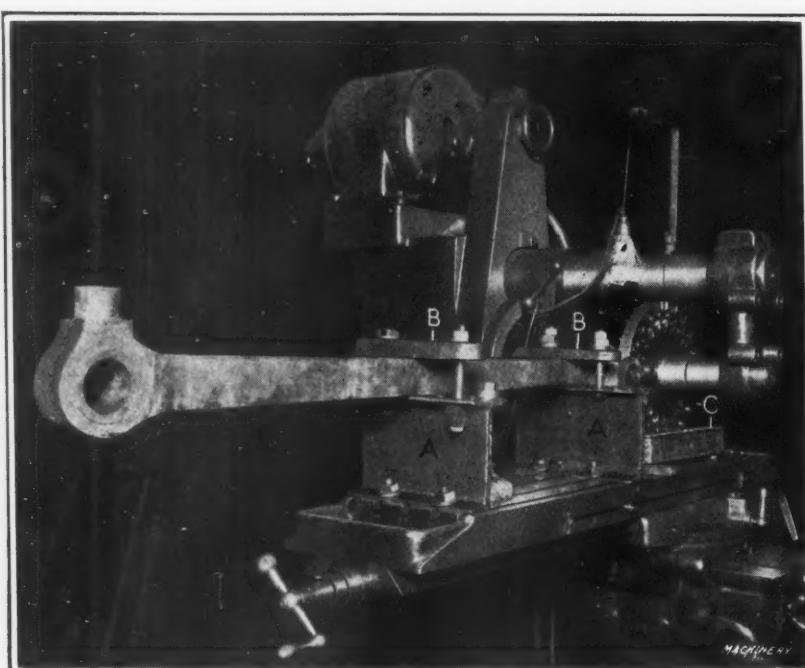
Milling Machine equipped for facing Boases on Eccentric Rod of Baker Valve Gears
